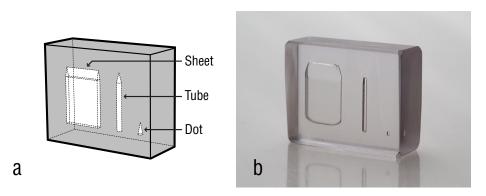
Sheets, tubes,* and *dots* are primitive elements for fabricating reflective pockets of air inside a 3D print that can be illuminated with mobile projectors to form a display area. Due to material settling, digital geometry (a) differs slightly from the actual printed form (b).
